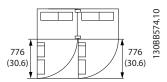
Space in front of IP21/IP54 enclosure type, frame size F10
